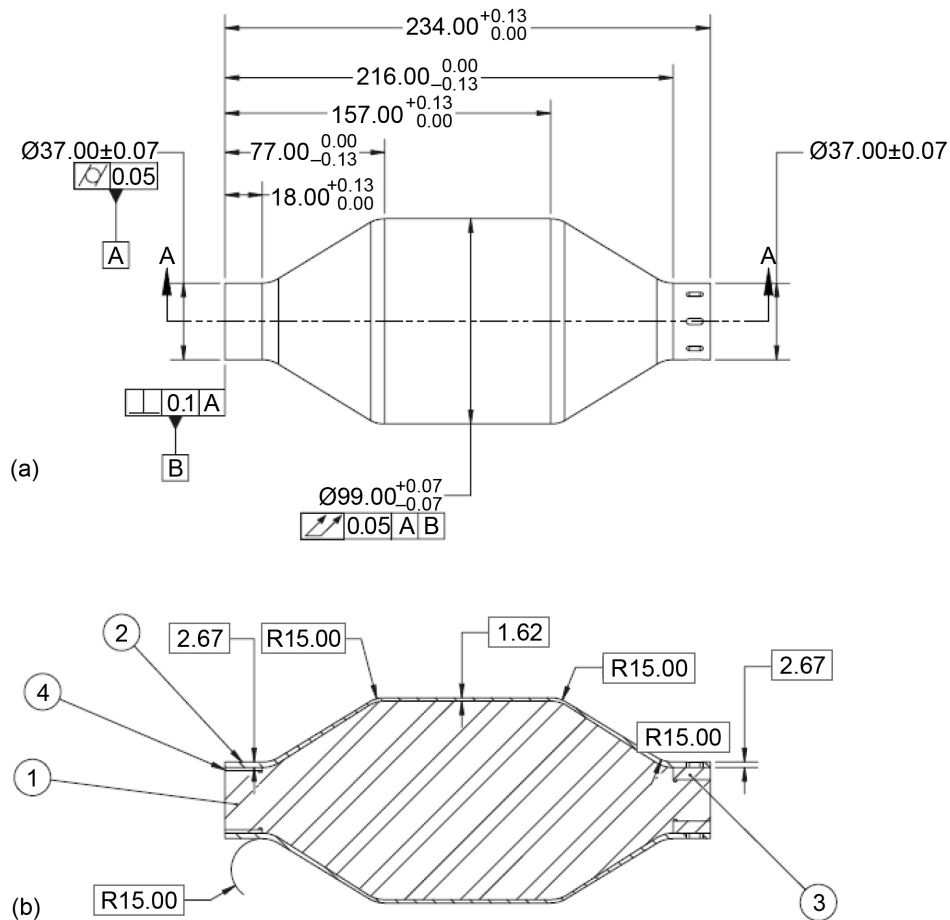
Carbon fiber shaft engineering drawings; dimensions in mm. (a) Exterior dimensions of entire part. (b) Cross-sectional view of part: 1, washout mandrel; 2, shaft; 3, premachined output side-bearing ID sleeve; 4, inner shaft sleeve, input side.
